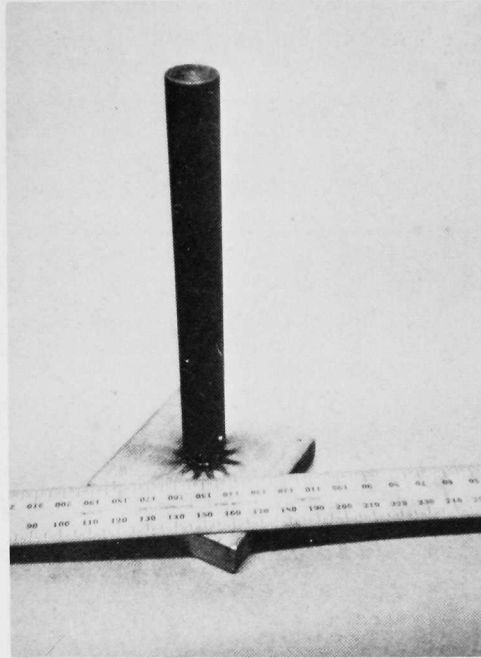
Waveguide Weld Specimen. Neg. No. MSD-62447.
